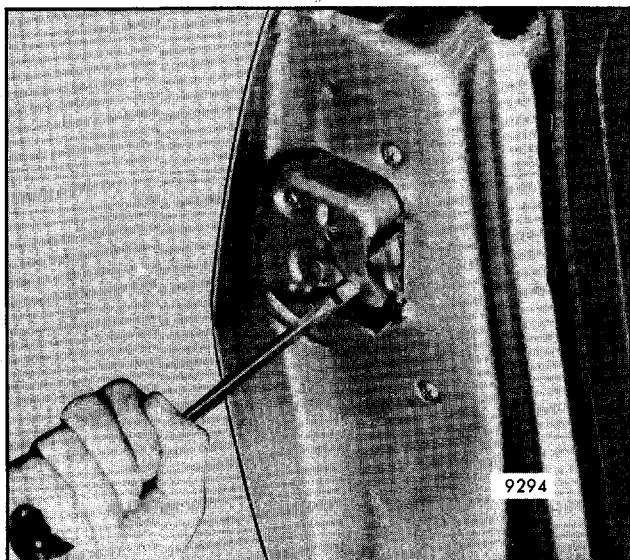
Manually Latch Upper Right Lock - Upper Lock Shown, Lower Lock Same
